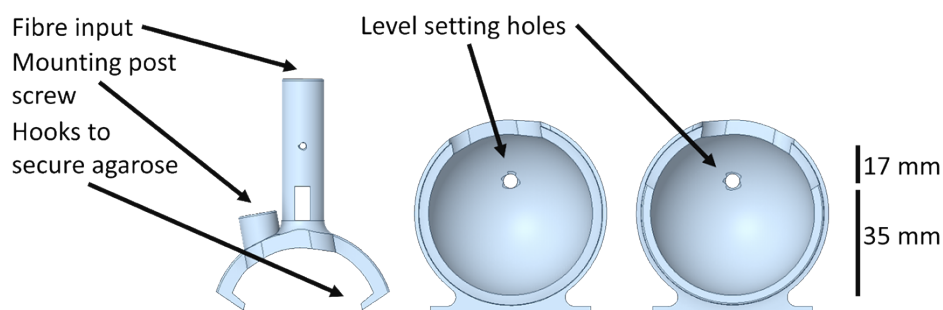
Renderings of a 3D-printed phantom holder and mold. (On the left) Holder used to secure and align the phantom to the mounting post and optical fiber. (Middle) One half of the spherical shell mold. (On the right) The second half of the spherical shell mold.
